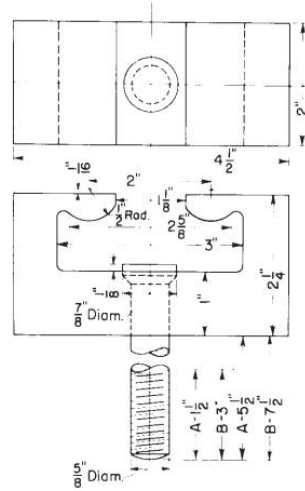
Tension-Perpendicular-to-Grain Test Assembly
